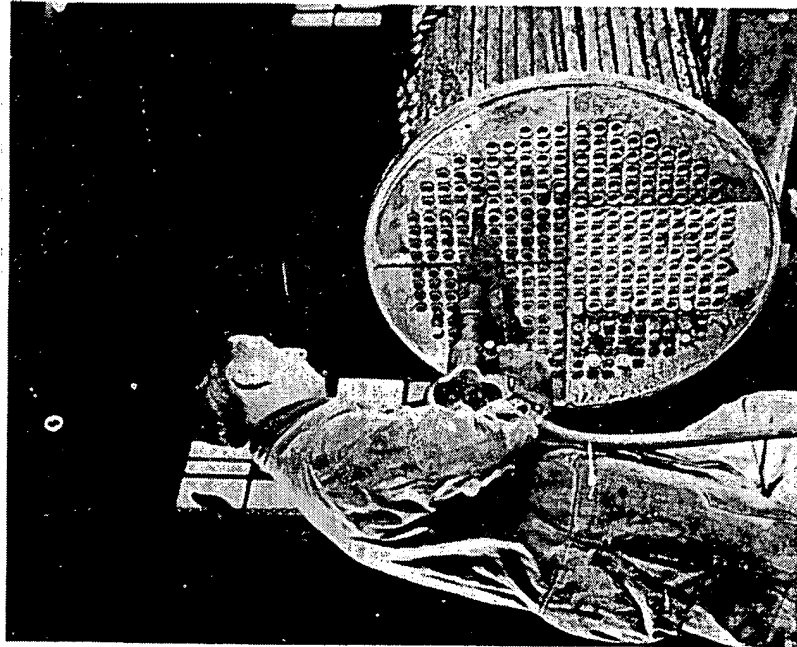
Expanding the ends of the tubes into the tube plate of a heat exchanger bundle
